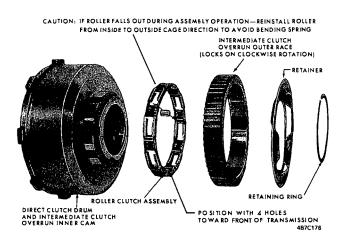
C-112 - Intermediate Overrun Roller Clutch Assembly
